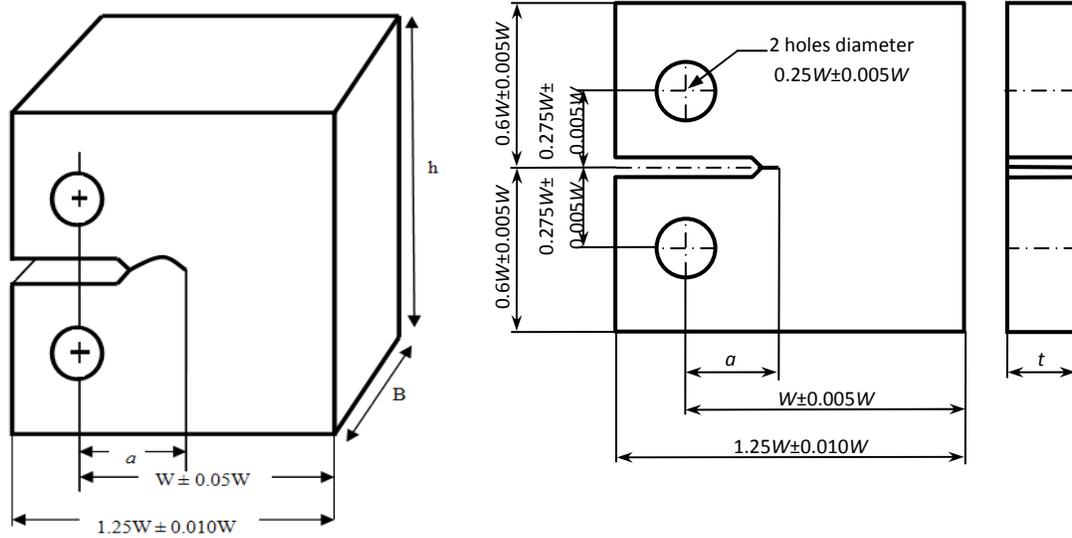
Compact Tension Specimen (CTS) adapted from ASTM E-399-90
